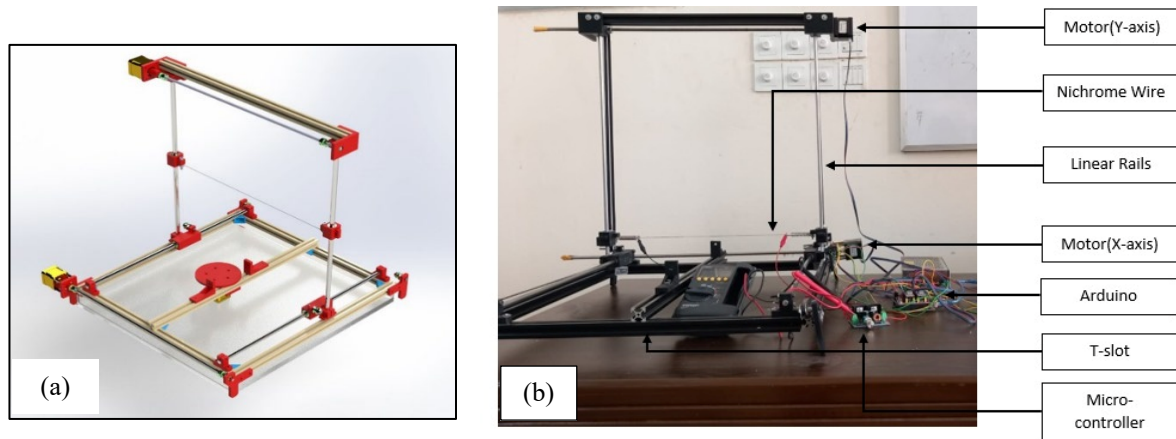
(a) CAD Design of CNC Styrofoam Cutter (b) CNC Styrofoam Cutter
